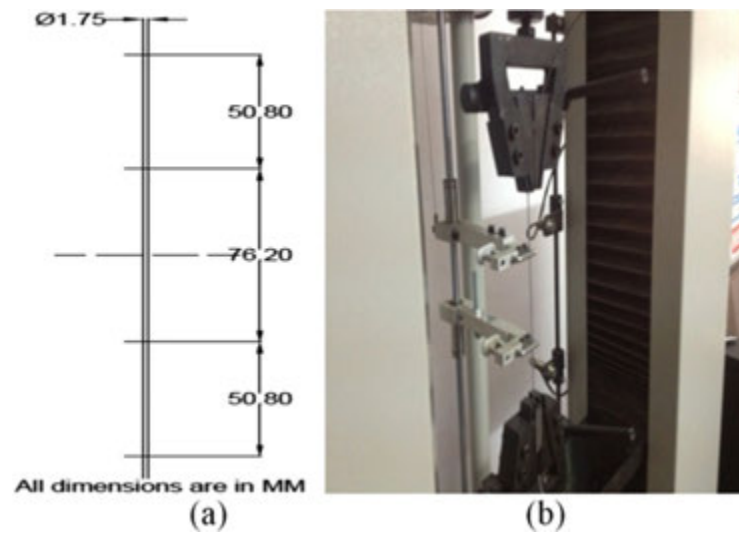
Universal testing setup; (a) specimen dimension and (b) testing of sample.
